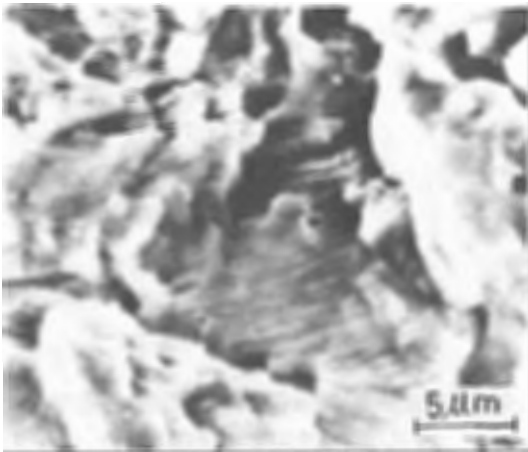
SEM fractograph showing striations on the fatigue fracture surface of bolt.
